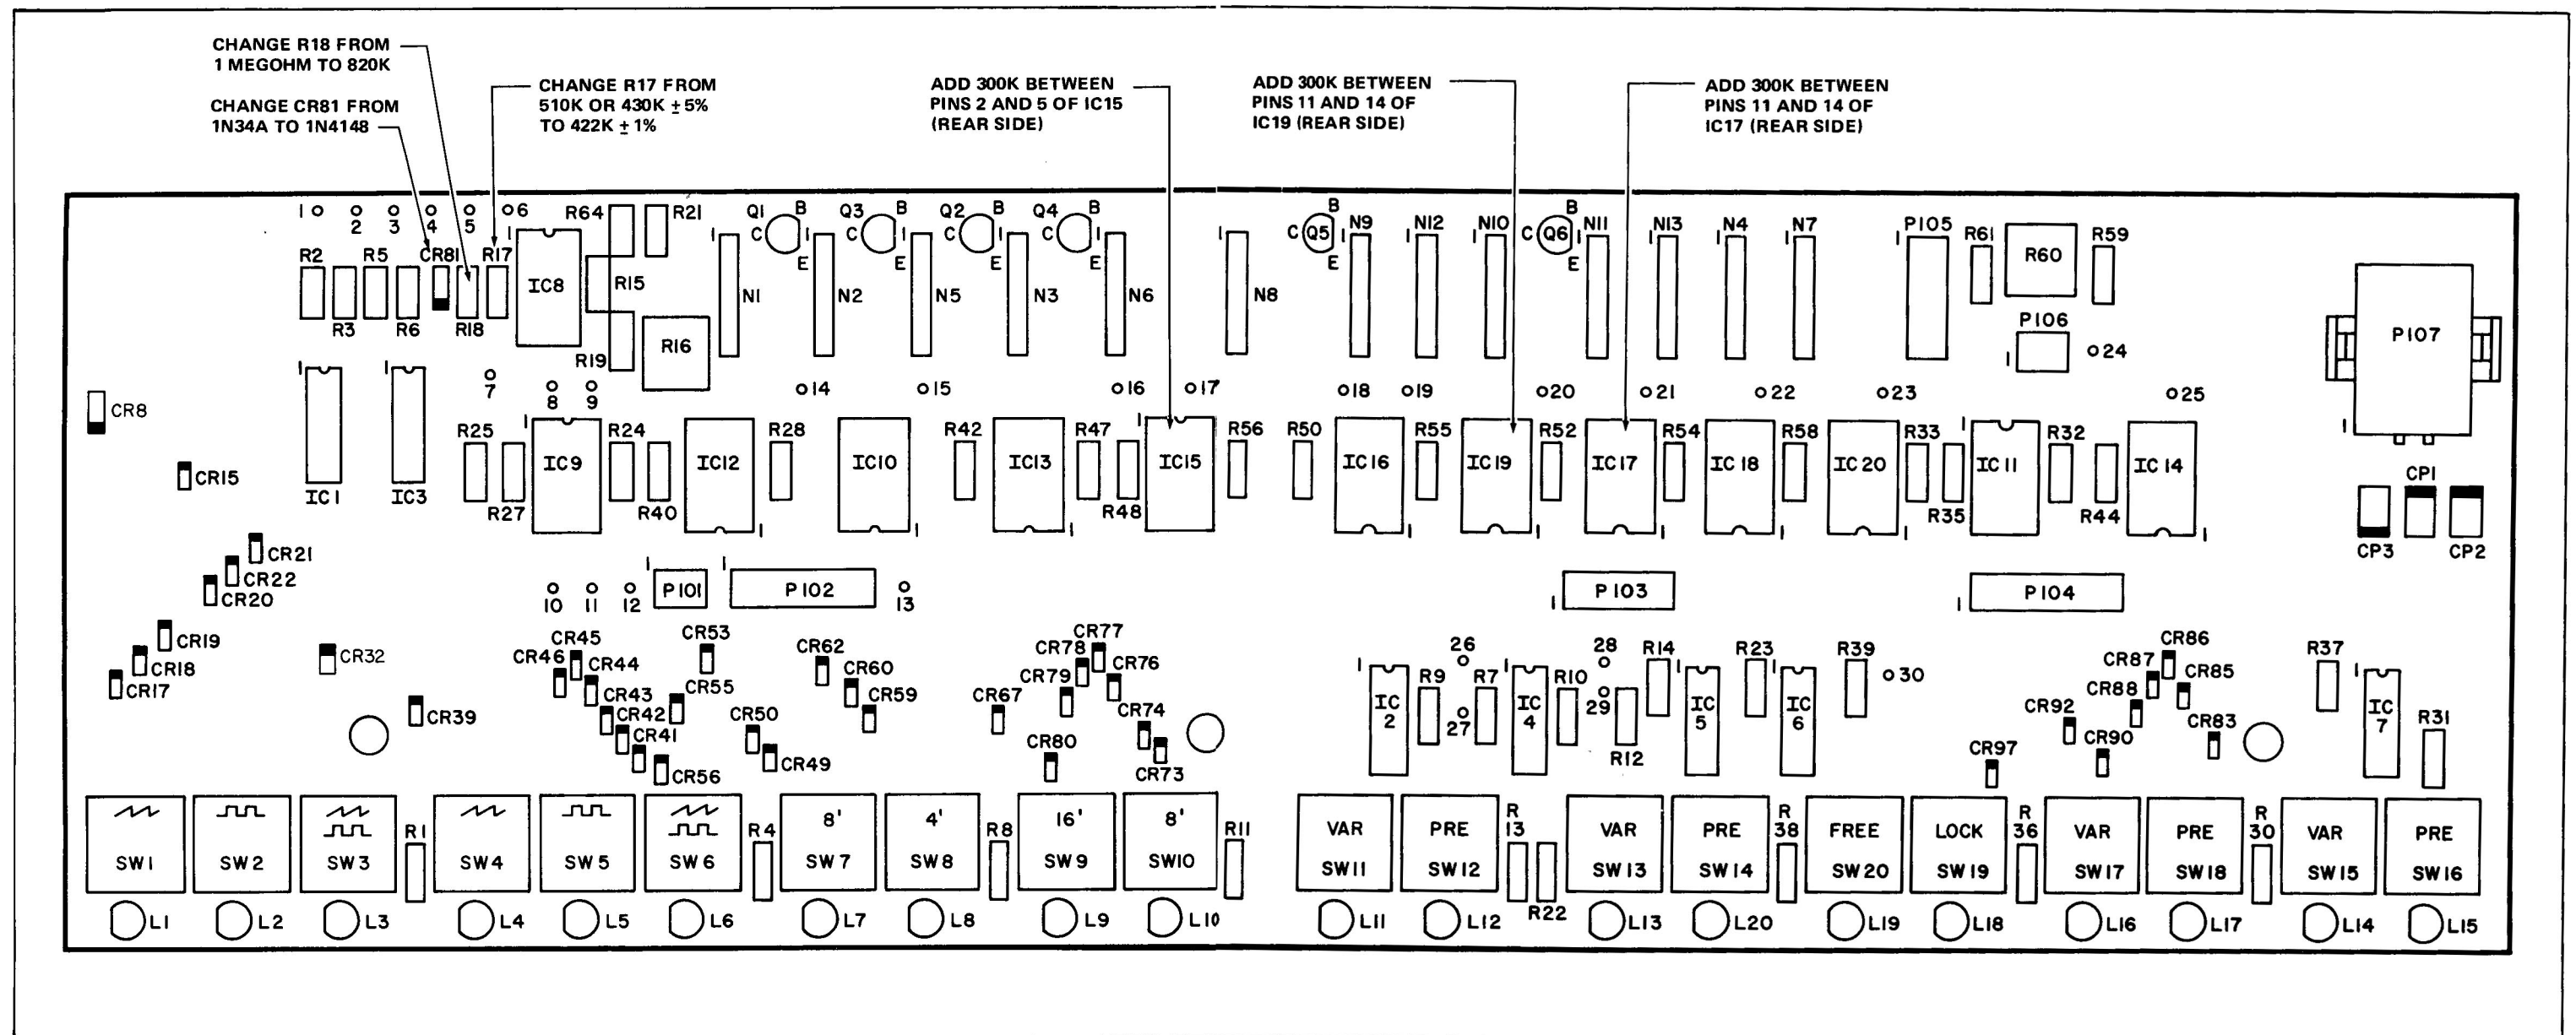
LEFT HAND CONTROL PRINTED CIRCUIT CL BOARD 10 (POLYMOOG)
